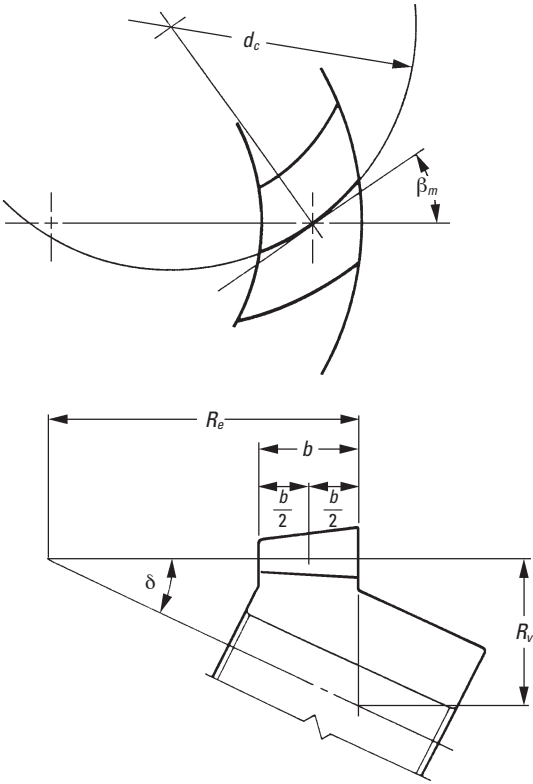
Spiral Bevel Gear (Left-Hand)
